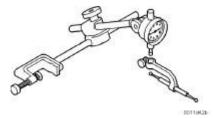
SET, DIAL INDICATOR - C-3339A Courtesy of CHRYSLER LLC
